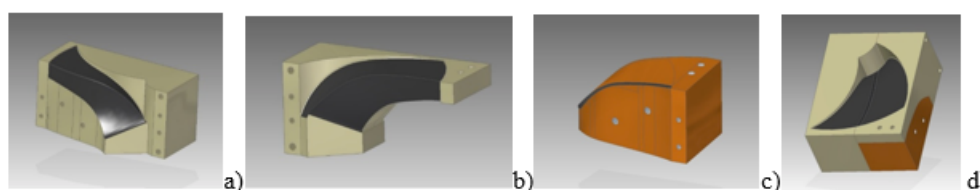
a),b),c) Components of the mold; d) Mold Assembly (Brown- Necuron 651; Light brown- Necuron 1001)
